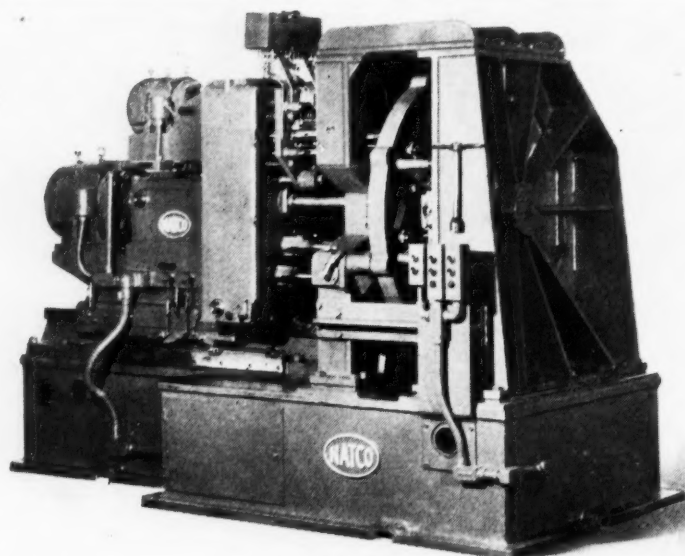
Natco Machine Built for Drilling and Tapping Rear-bearing Retainers
